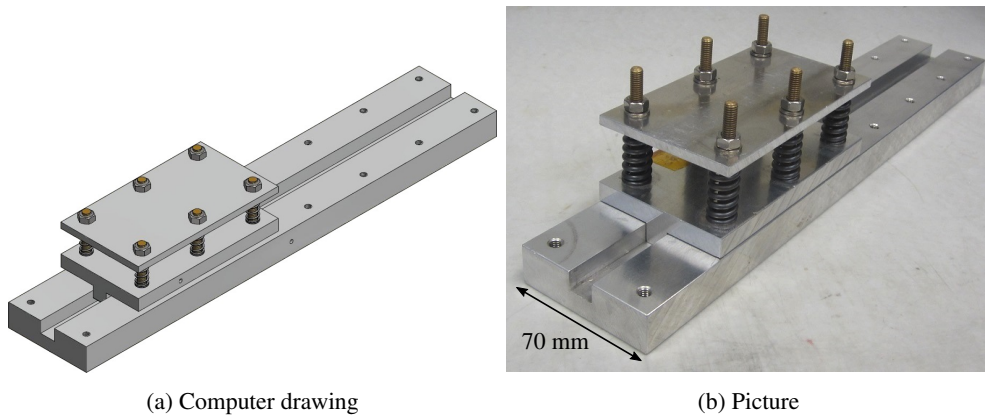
Aluminium tool for soldering tapes and cables with an applied force.
